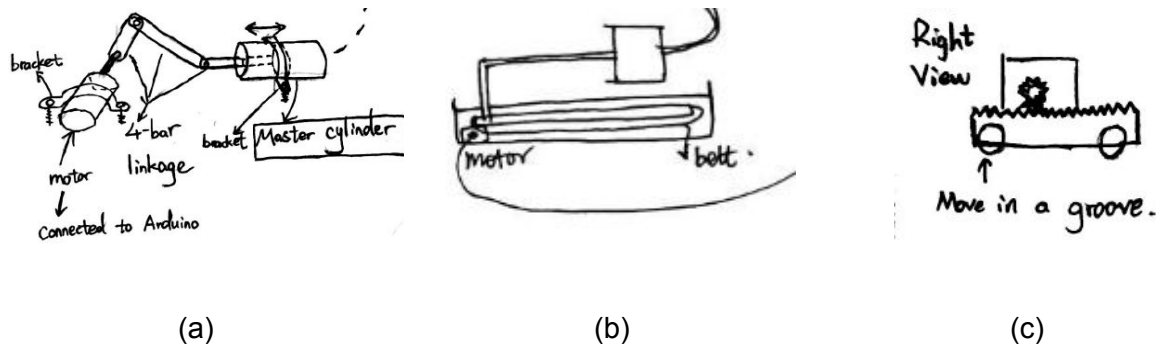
Sensor assembled at the gear lever. (a) Four-bar linkage; (b) Rolling belt; (c) Gear transmission
